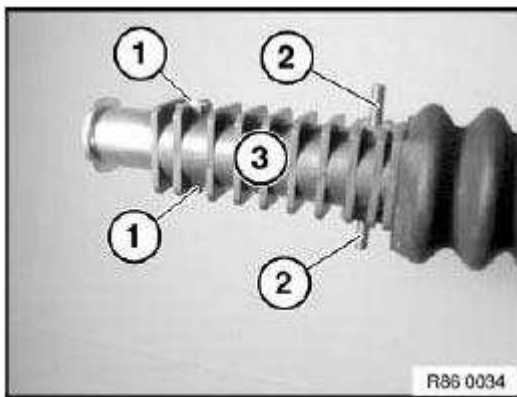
Identifying Spacer Tubes, Threaded Pins & Guide Bush
